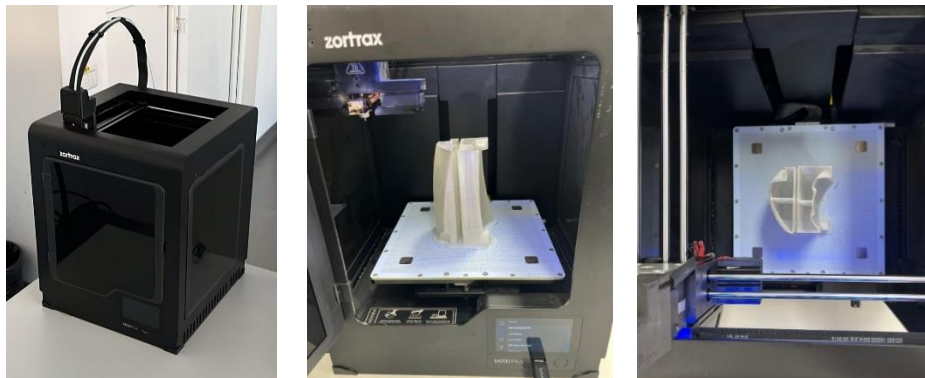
3D printing of mold (*method 2*) on Zortrax M200 Pro
